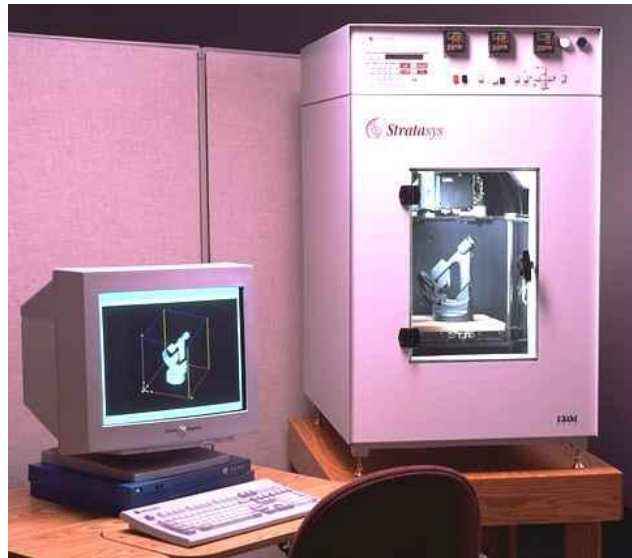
A FDM (fused deposition modelling) Rapid prototyping machine
